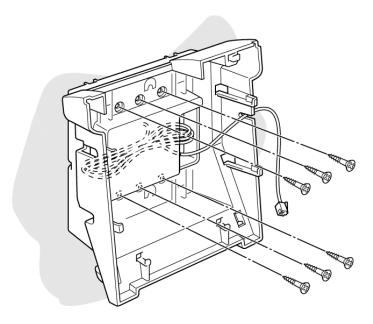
Attaching the Wall Mount Unit to the Wall
